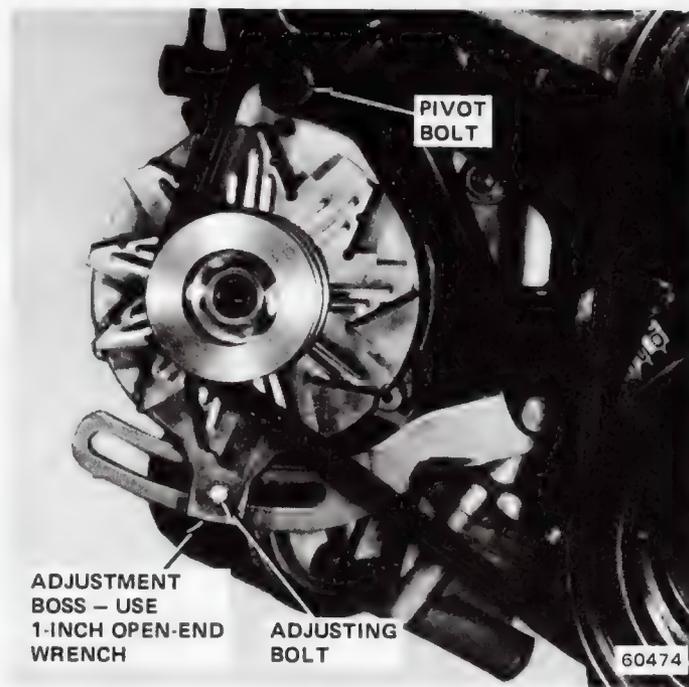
C-17 Alternator Adjustment—Eight-Cylinder
